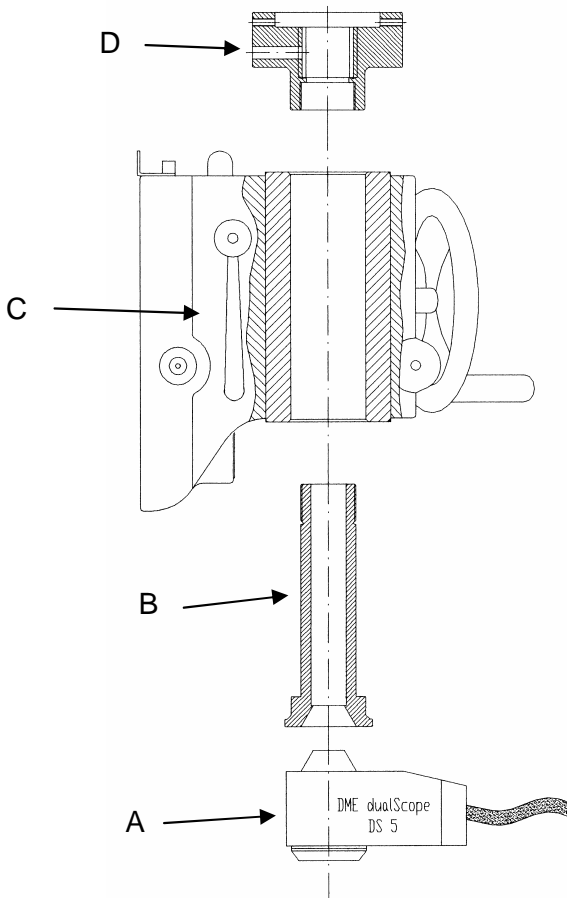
The special fixture developed for mounting the AFM on the Z-axis. (a) AFM, (b) lower part of fixture, (c) Z-axis and probe holder and (d) upper part of fixture.
